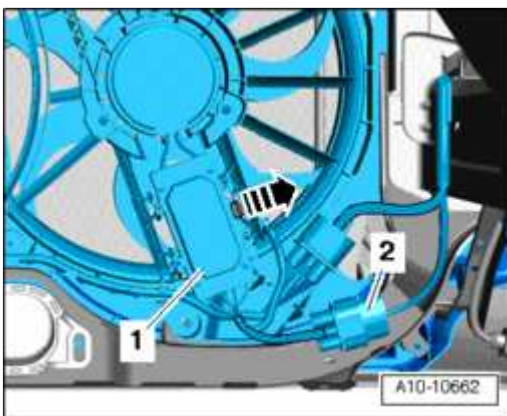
Identifying Clip, Coolant Fan Control (FC) Control Module J293, And Electrical Harness Connector
